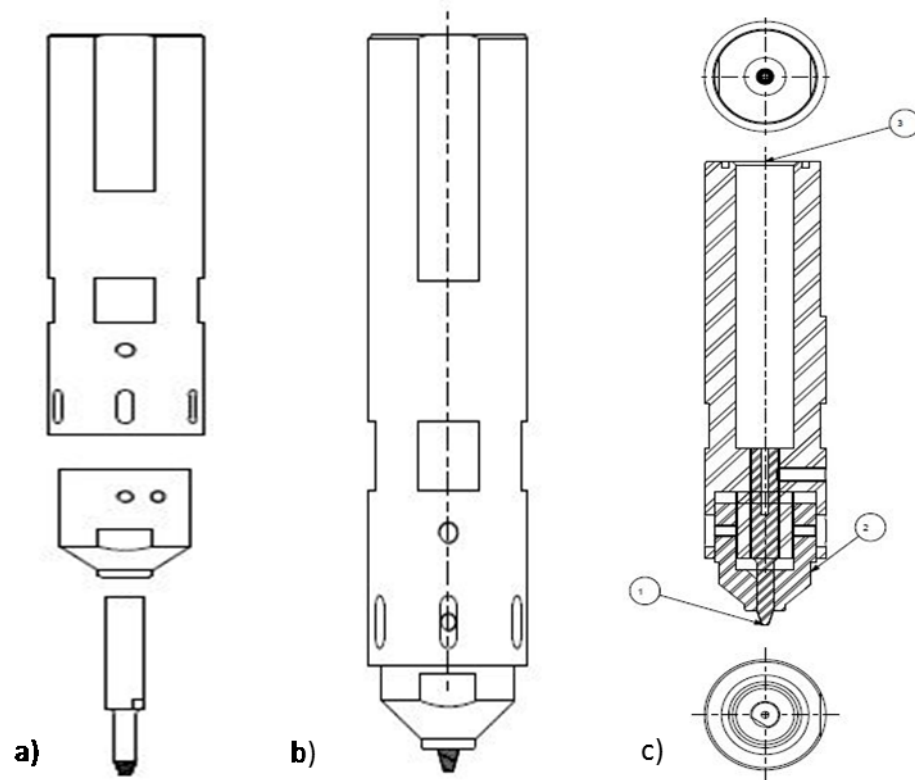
THE-FSpW Tool (a) Exploded View; (b) Assembled View (c) Sectioned View
